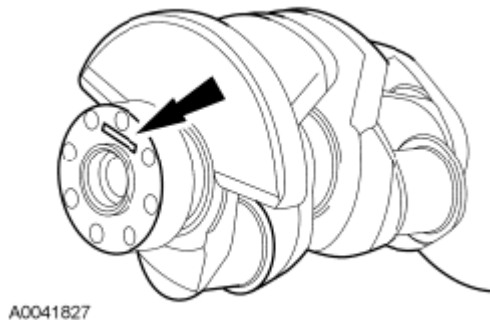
Locating Main Bearing Code On Back Of Crankshaft
